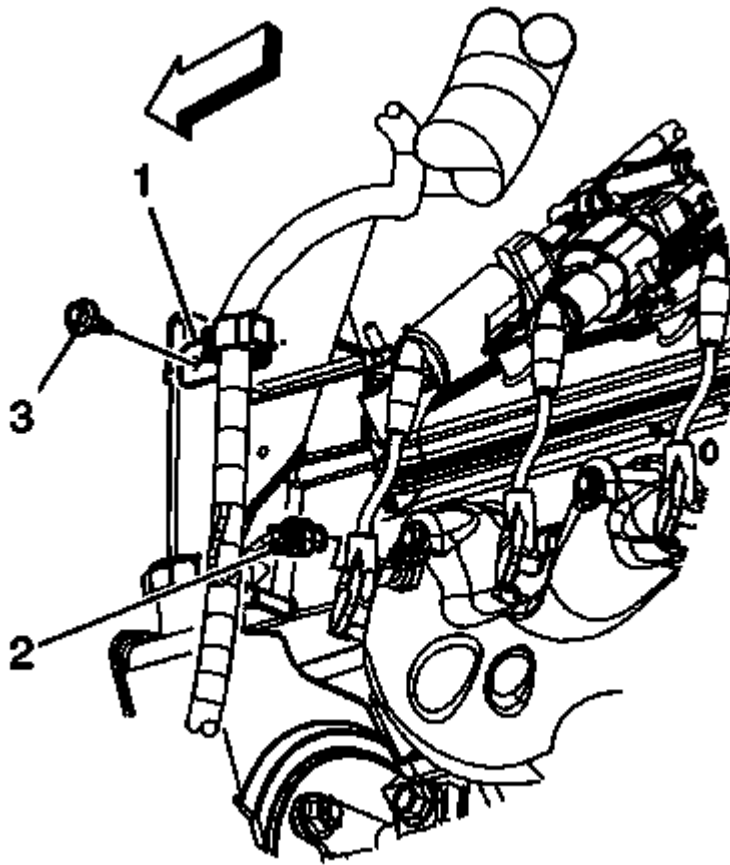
View Of EVAP Canister Purge Tube & Quick Connect Fitting
